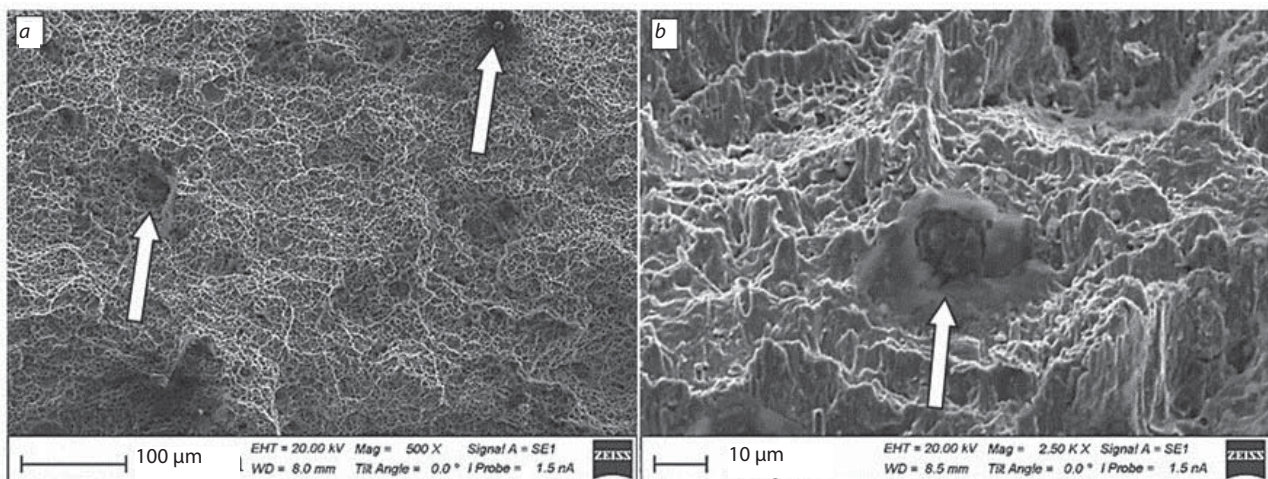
Viscous fracture surface of metal of weld No. 2. Arrows indicate nonmetallic inclusions
